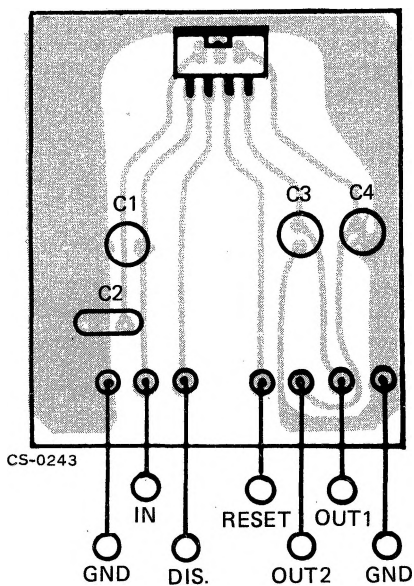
P.C. board and component layout of the circuit of Fig. 2 (1 : 1 scale)
